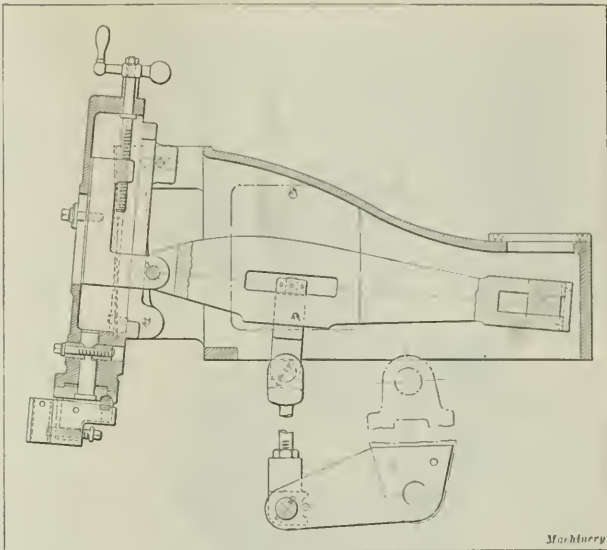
Details of Vertical Shaper Attachment developed by L. E. Rhodes
